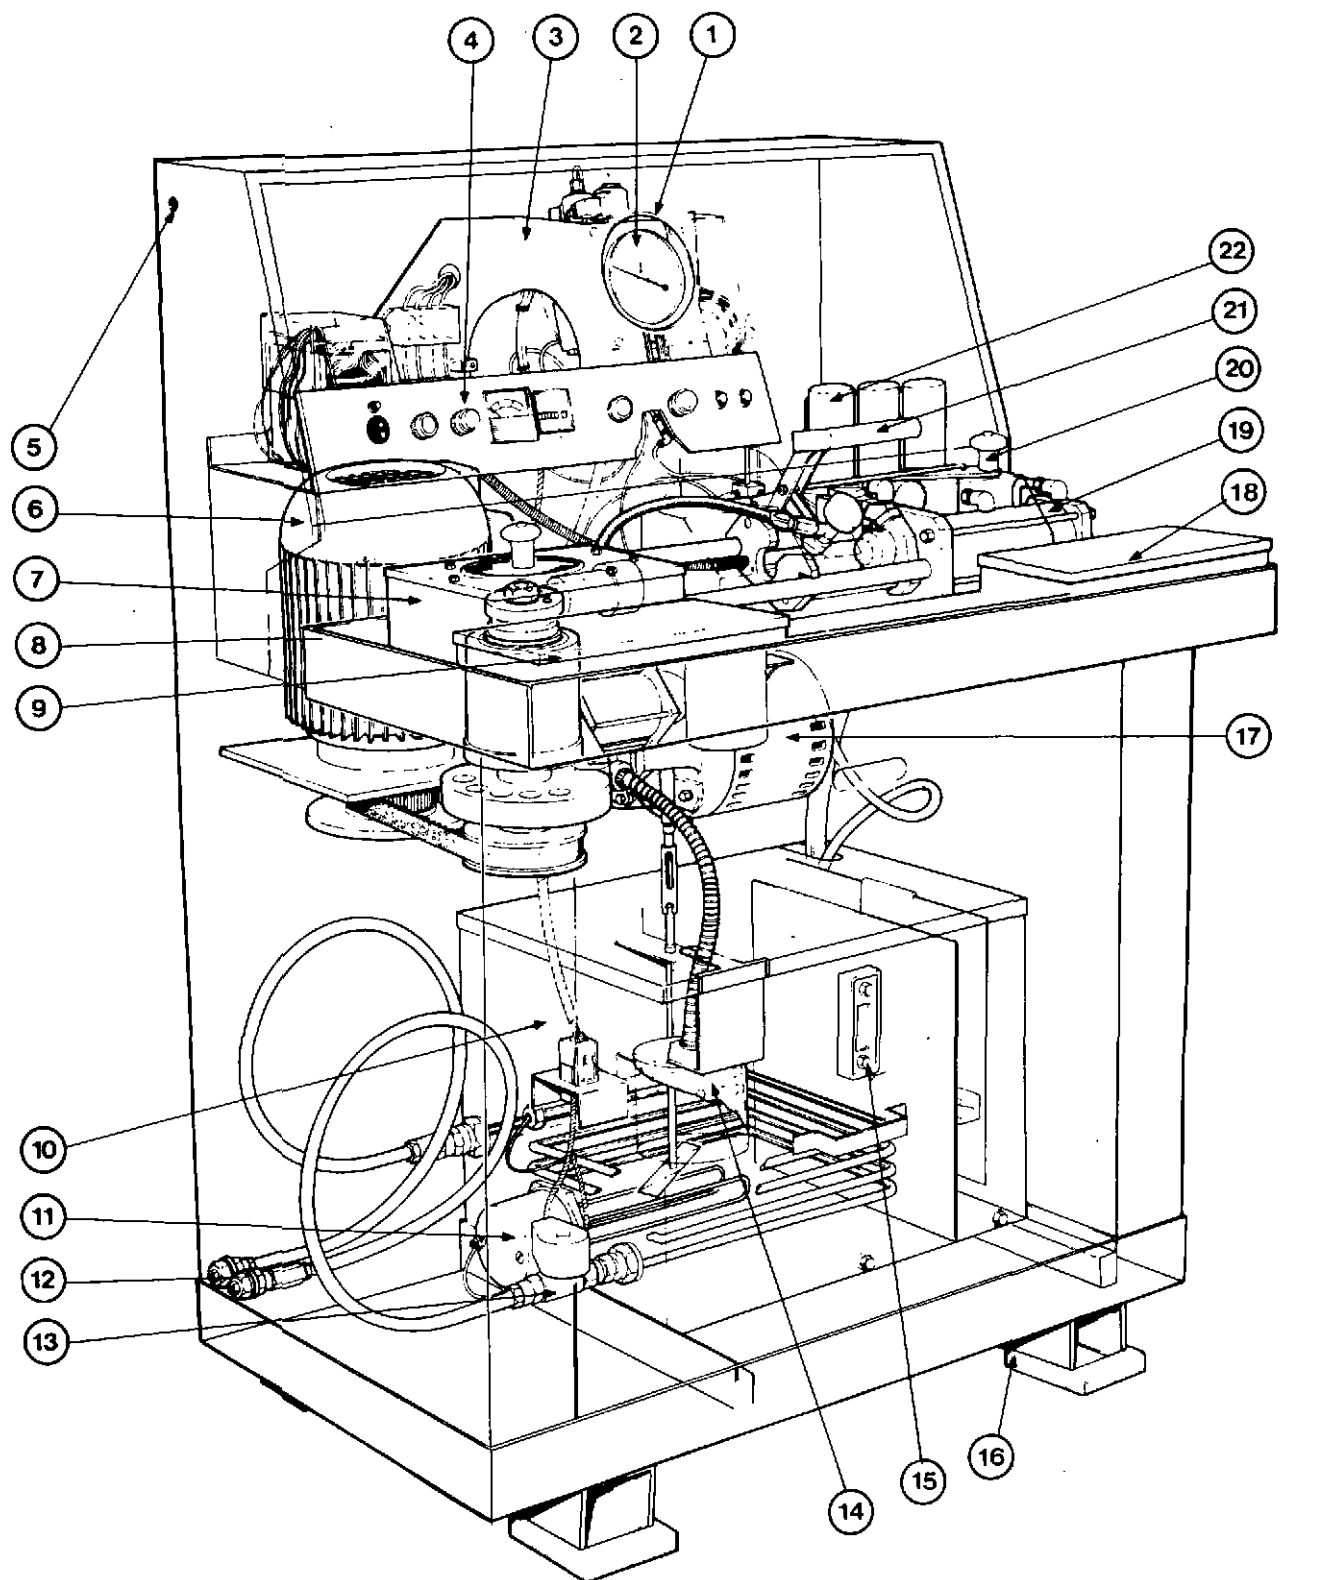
A. Injector leakage tester, Tool No. 3375375
